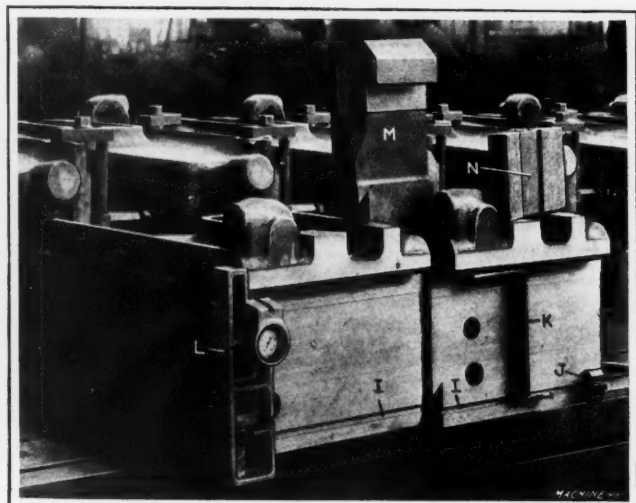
Close-up View of Milling Machine Knees, showing Gages for testing Accuracy of Planed Column Bearings
